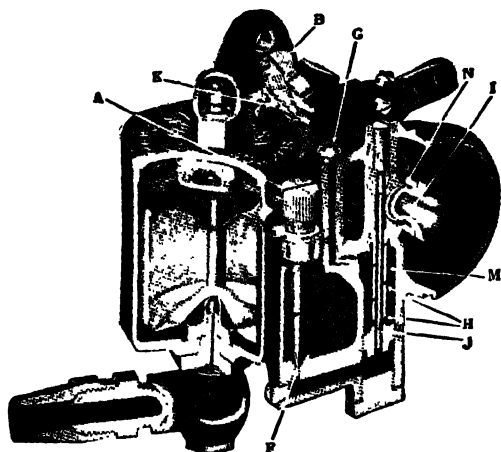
Stromberg Carburetor Type MB-1. (Sectional View.)
